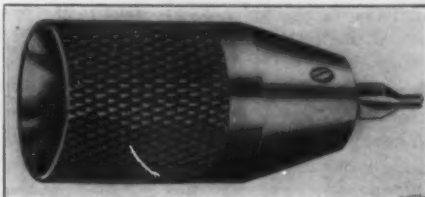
The Sure Center Finder for Lathe Work Made by W. A. Peck, New Haven, Conn.
